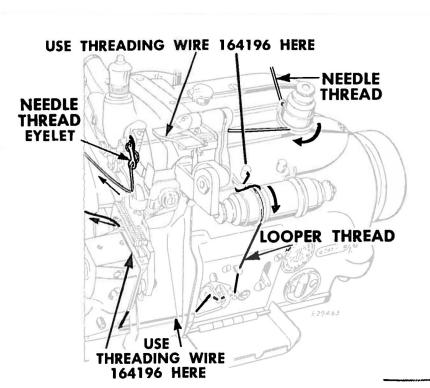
Threading Needle Thread Eyelet (Purl Stitch)
